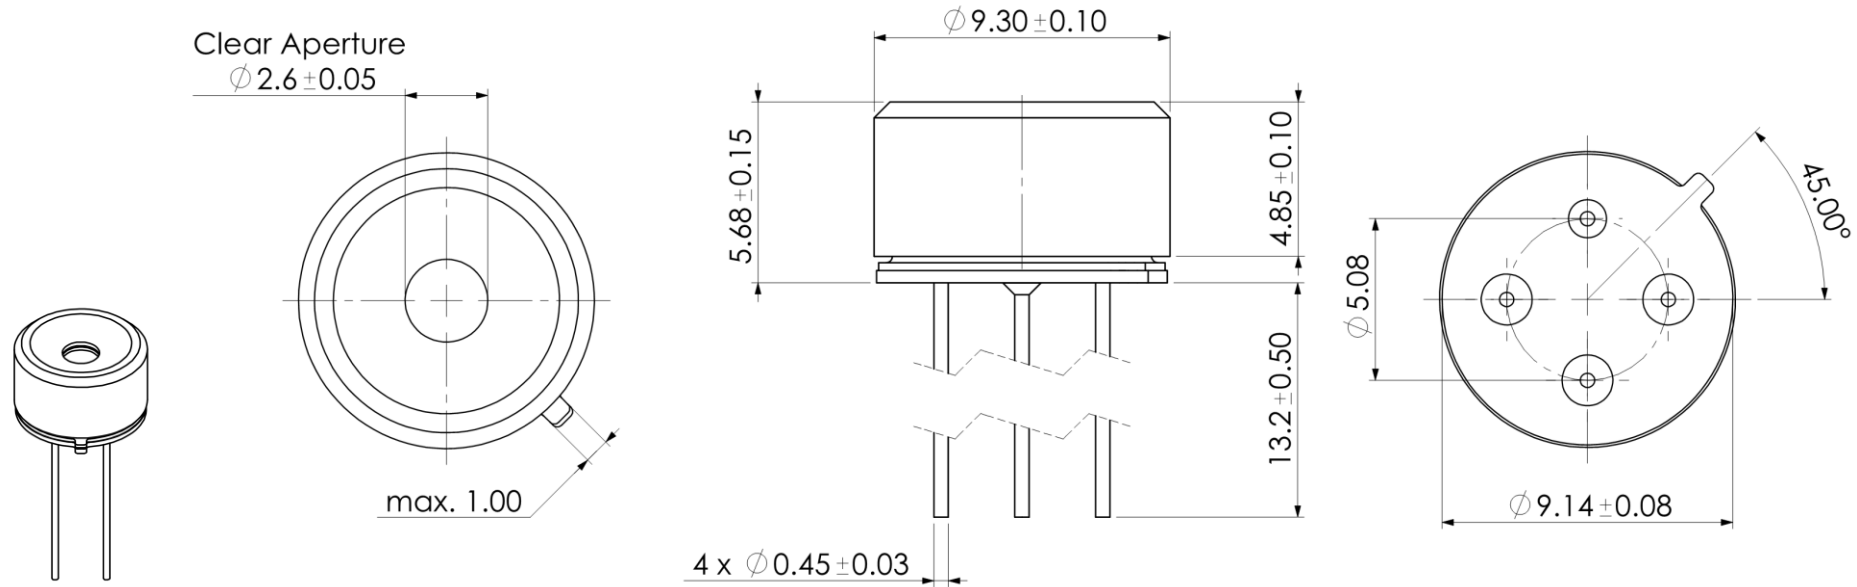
dimensional drawing of the HTPA16x4R1L2.1EA
